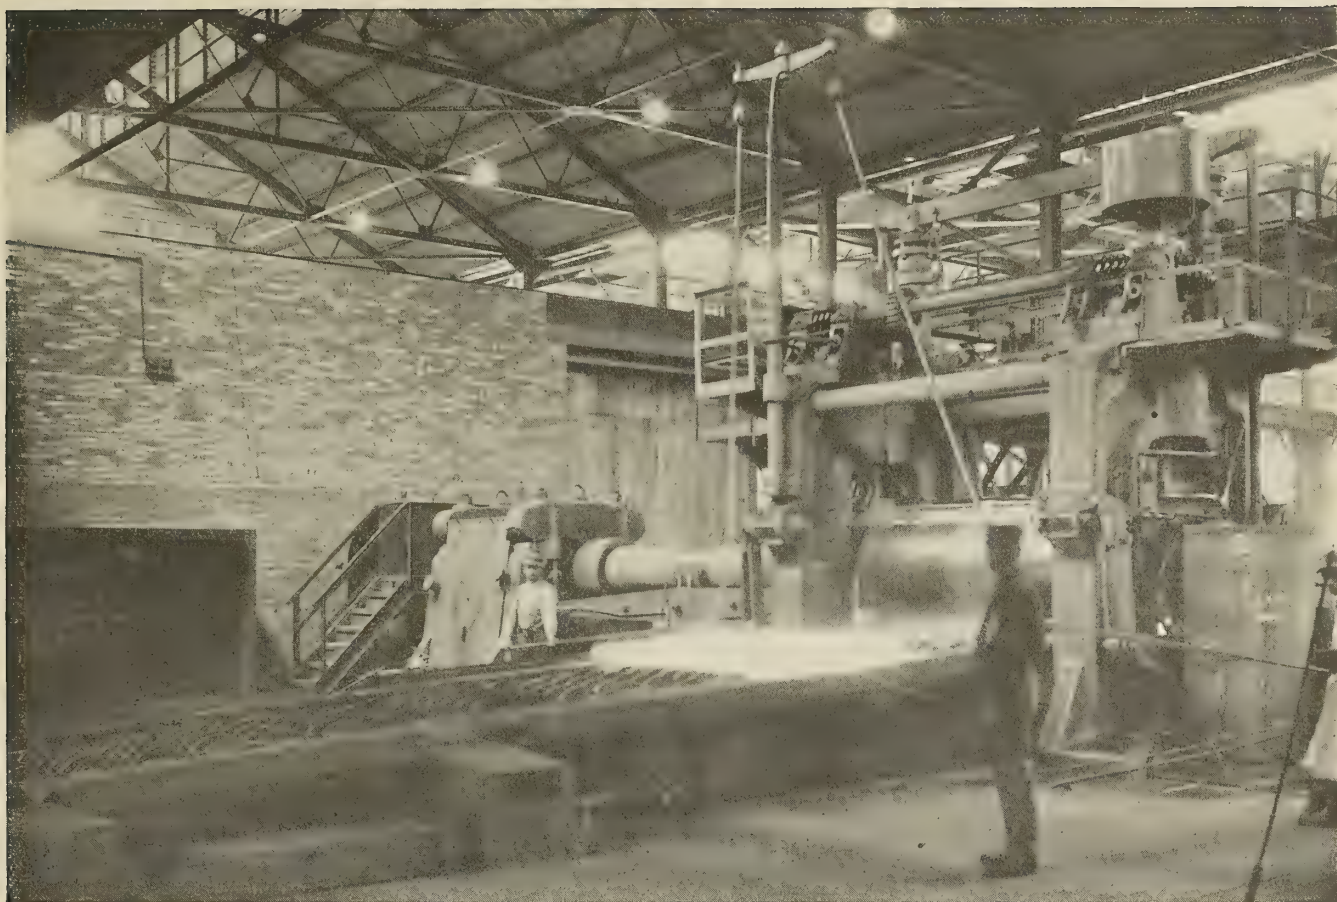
Front View of 110-Inch Liberty Plate Mill Rolling Ship Plates, October, 1917
